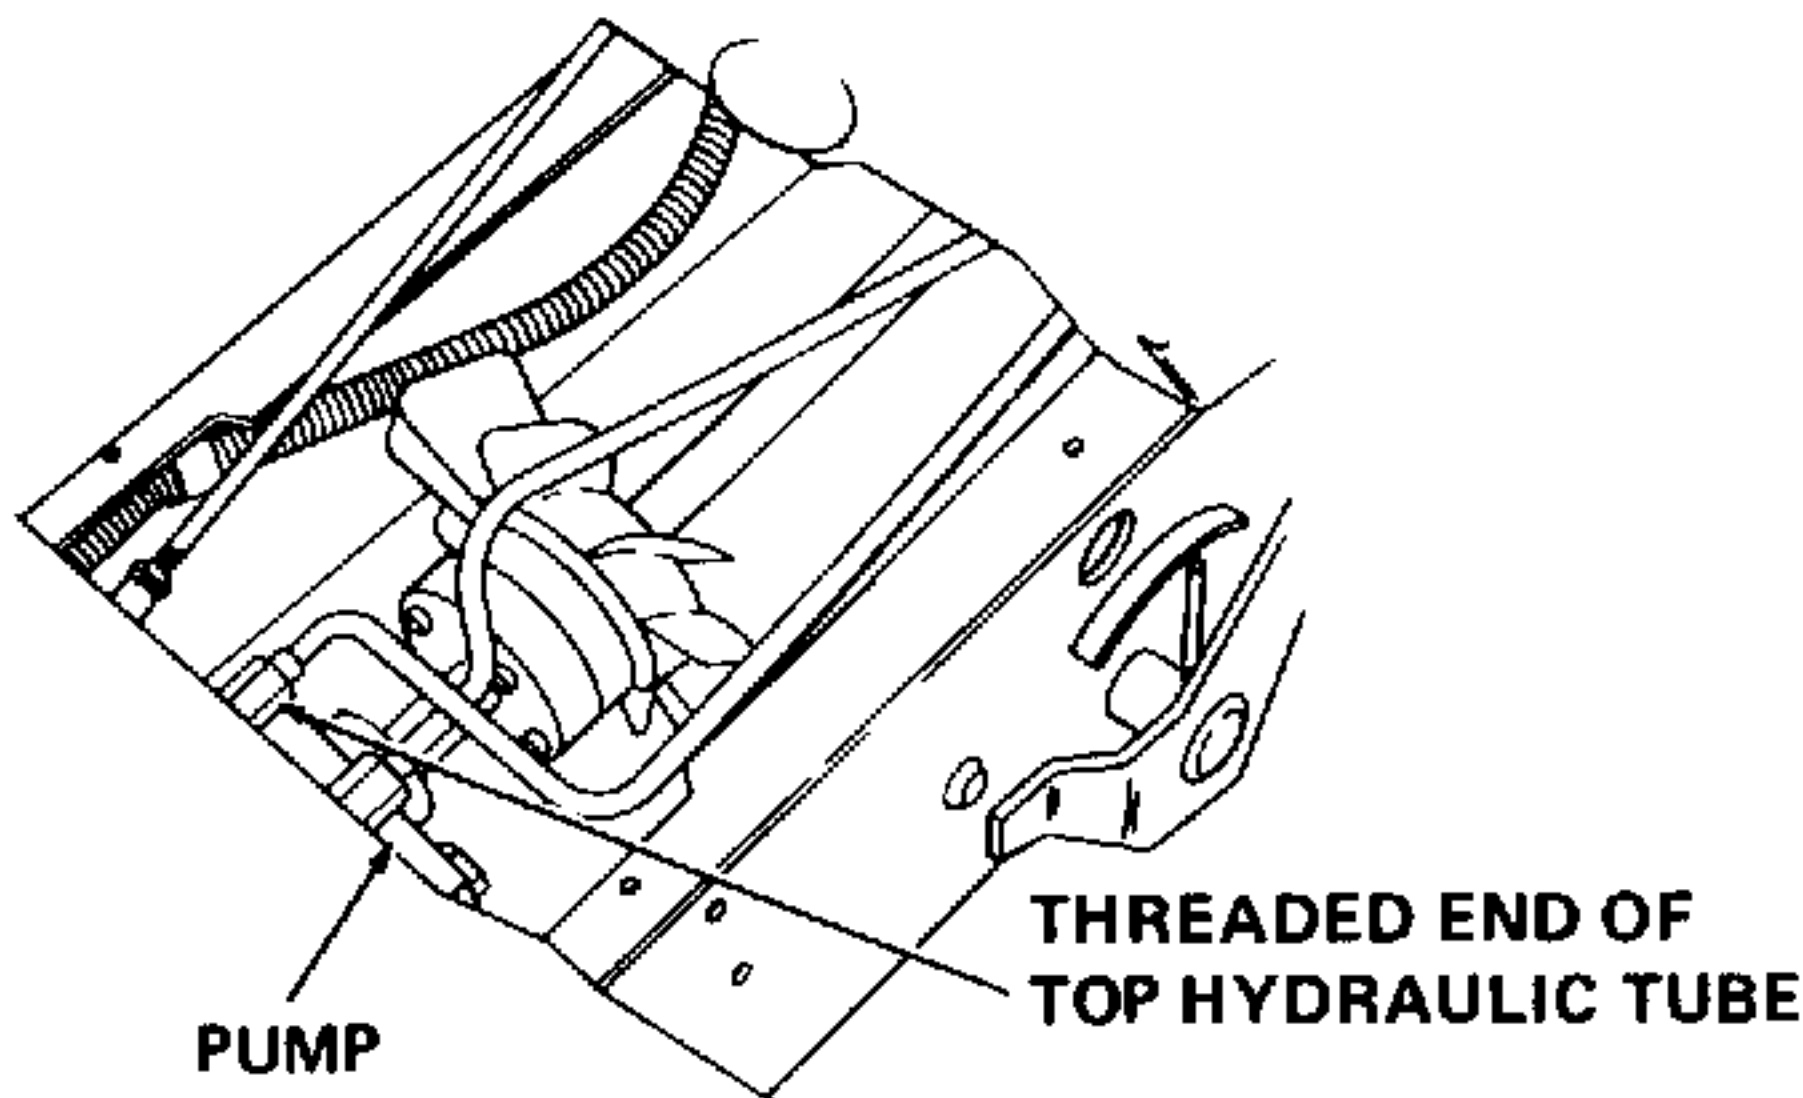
Removing Threaded End of Top Hydraulic Tube (Model 1541 Only).
